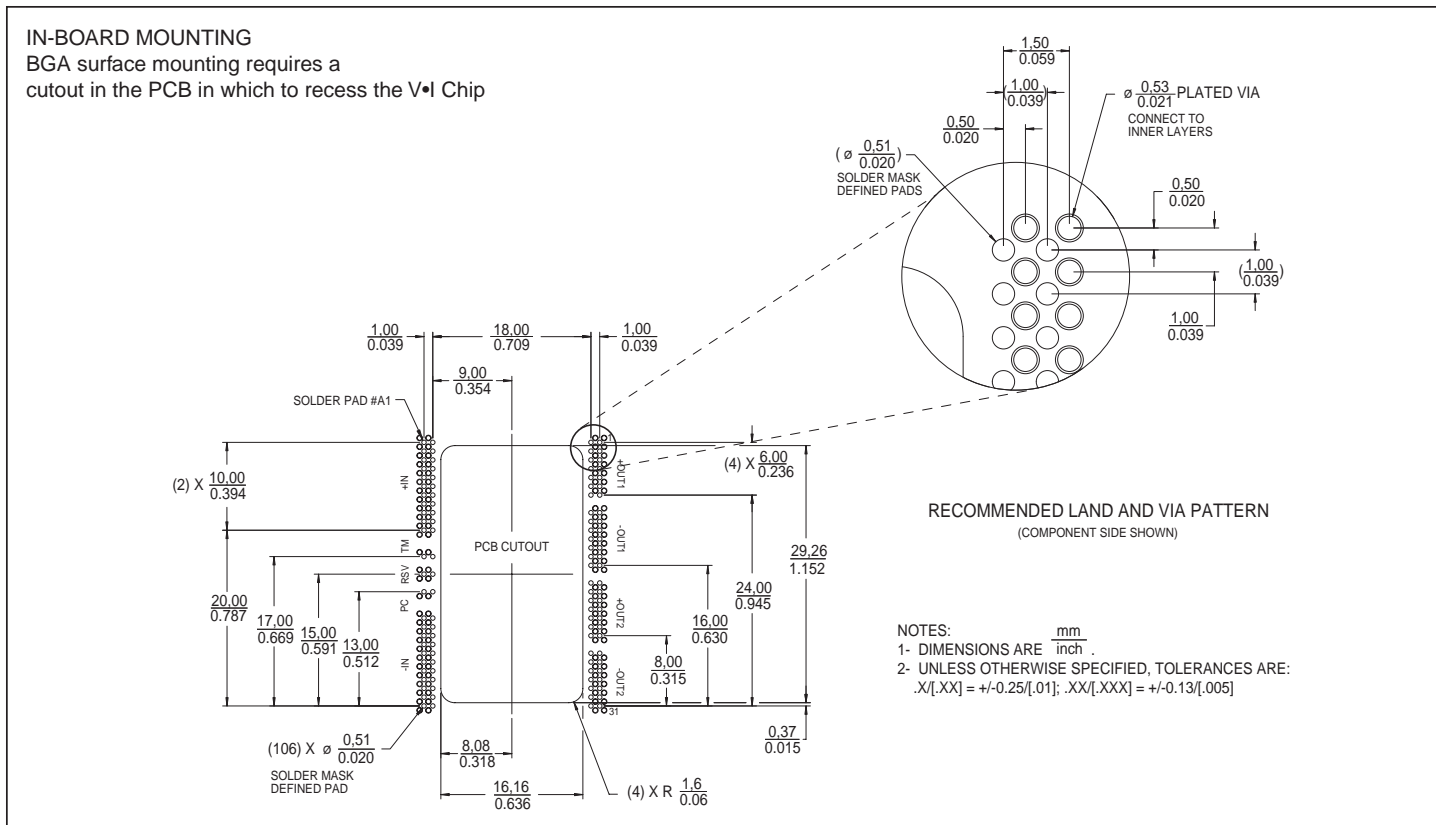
BCM BGA PCB land/VIA layout information; In-board mounting
